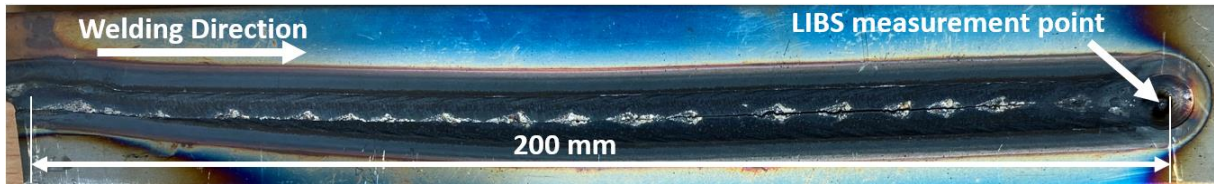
Finished weld seam of the Sample 4, LIBS measurement spot on the weld end crater is marked.
